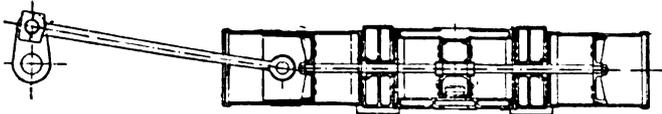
Section through Gas and Air Pump, Mather & Platt Engine (Koerting type).
